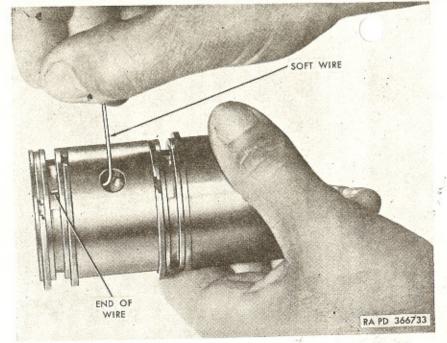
Checking and cleaning passages in front clutch oil delivery sleeve assembly.
